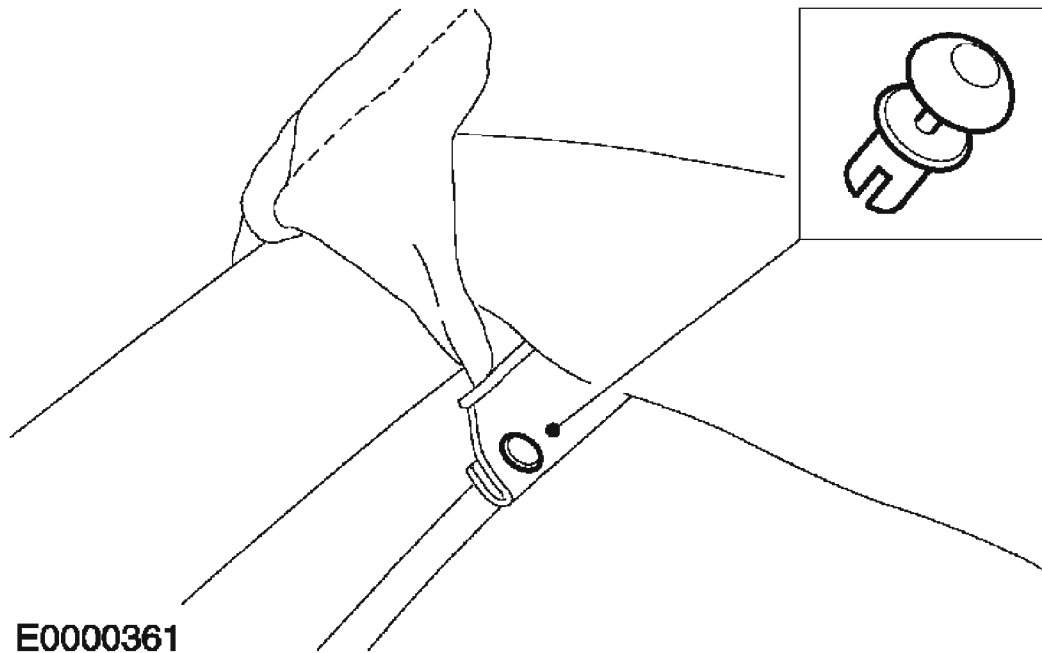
Removing Side Air Bag Module Deployment Chute J-Clip Rivet
